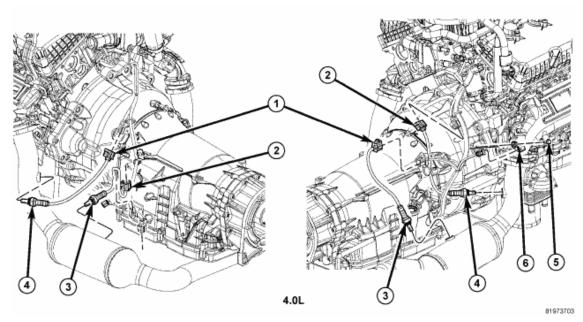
CKP/Oxygen Sensors Courtesy of CHRYSLER LLC
